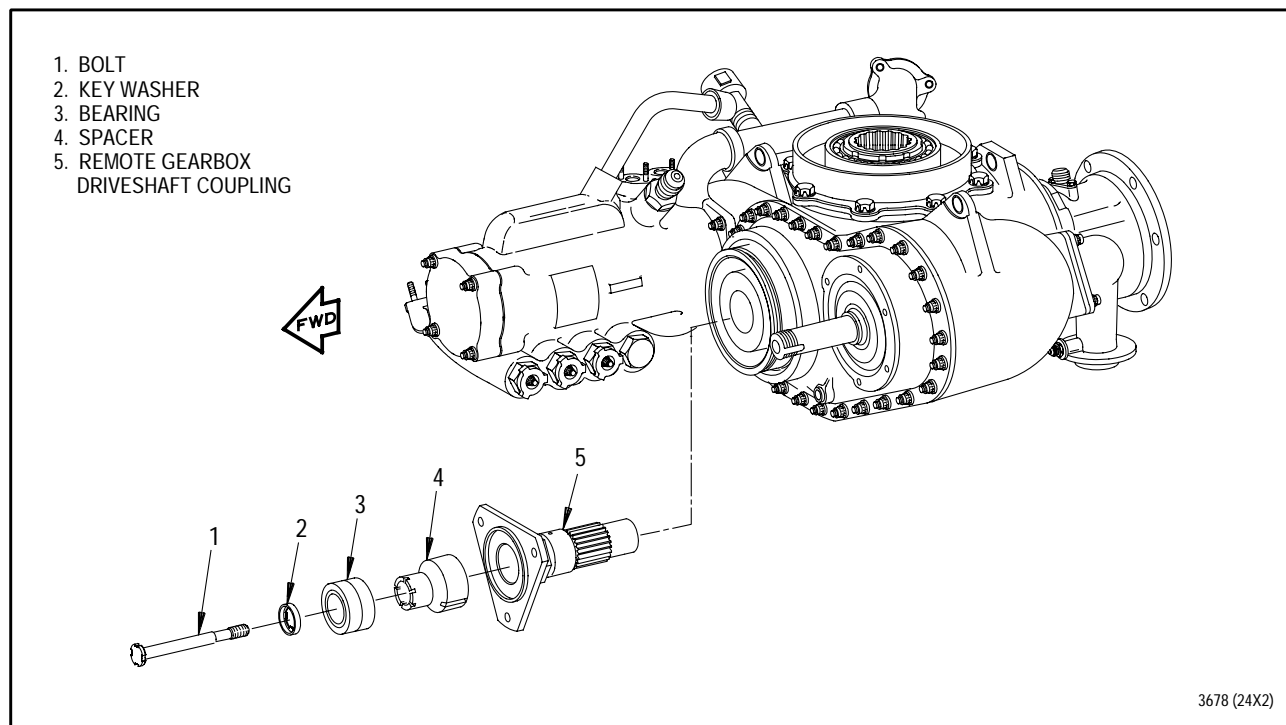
Remote Gearbox Driveshaft Coupling - Removal
